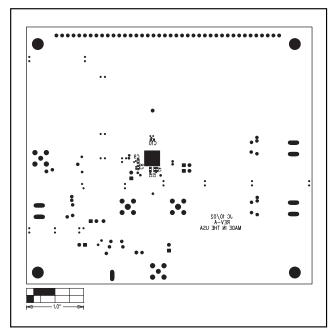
MAX5888 EV Kit Component Placement Guide—Solder Side
